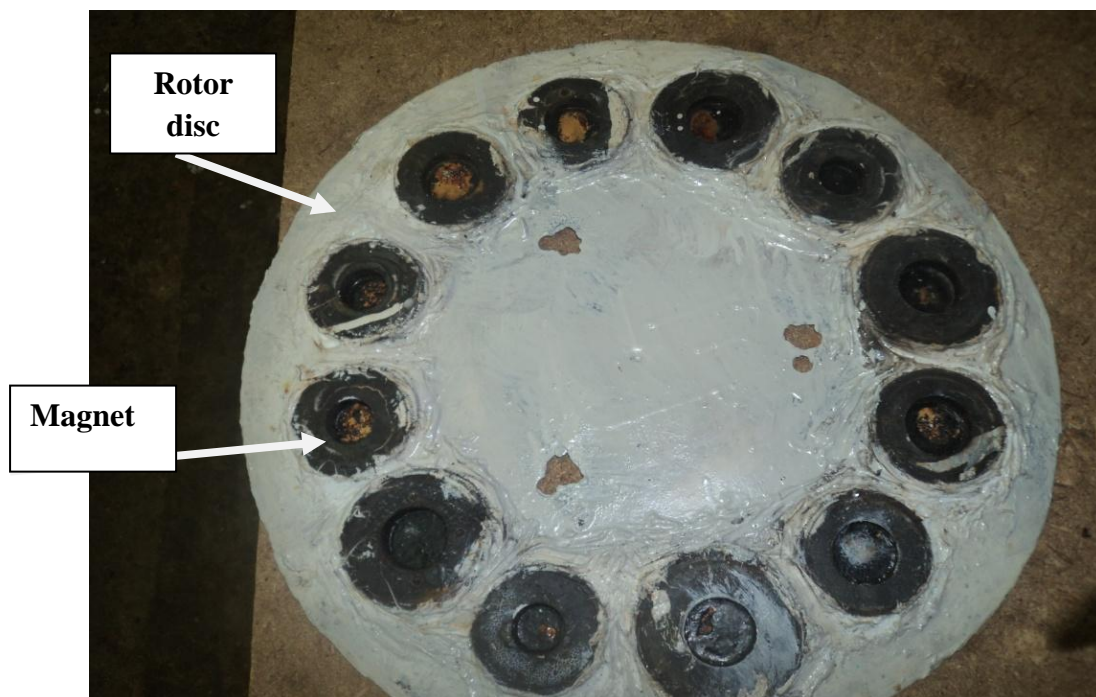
Photo of One of the Rotor Assemblies of the Prototype
